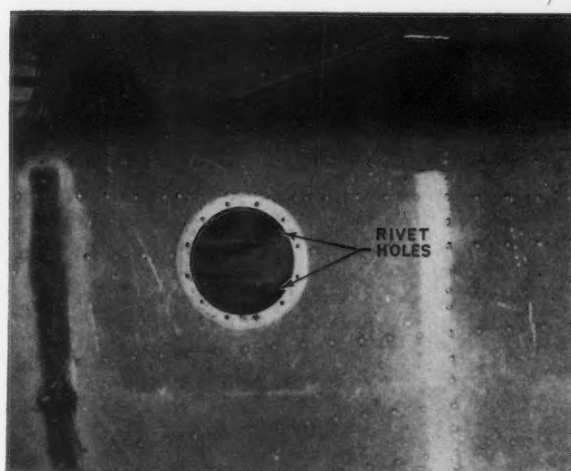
L-49 water tank showing where corroded aluminum rivets have dropped out.
